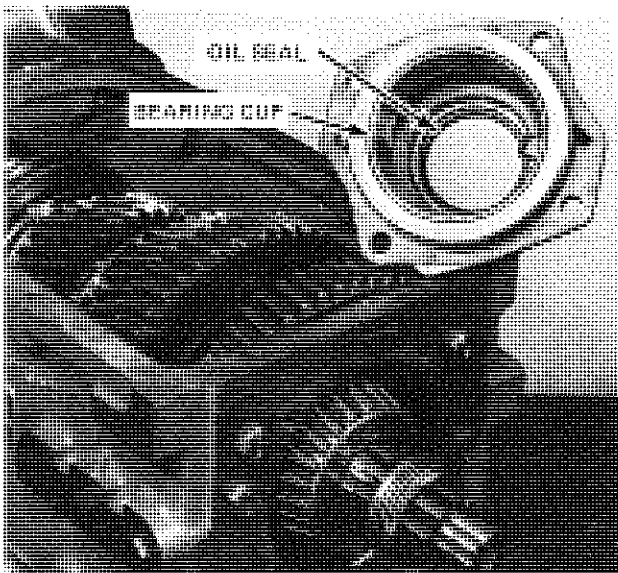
Inspect Rear Bearing Cup and Oil Seal
